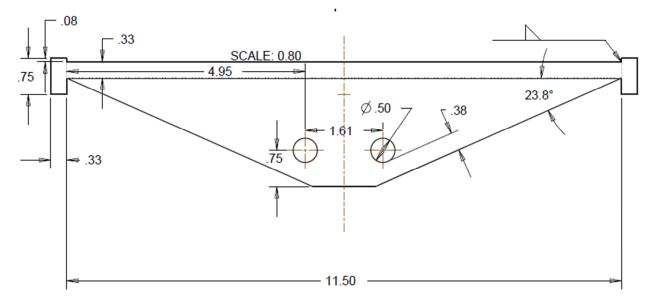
Final design of prototype solar support frame with 1/8" thick flat plate
